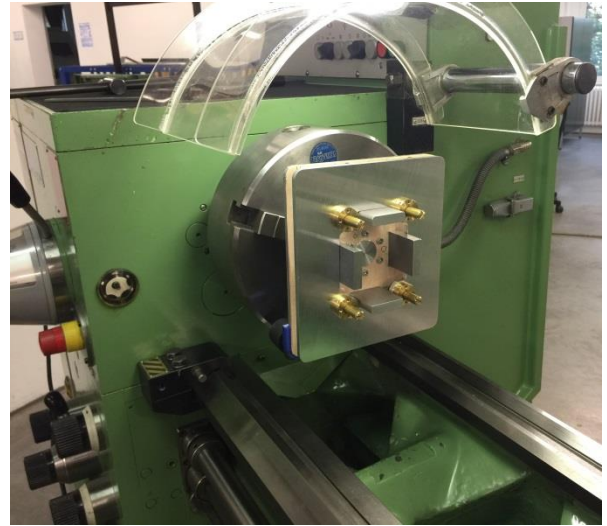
The coil frame mounted on winding spindle of a winding machine. The winding frame along with wire guide (not shown in the figure) ensures orthocyclic winding.
